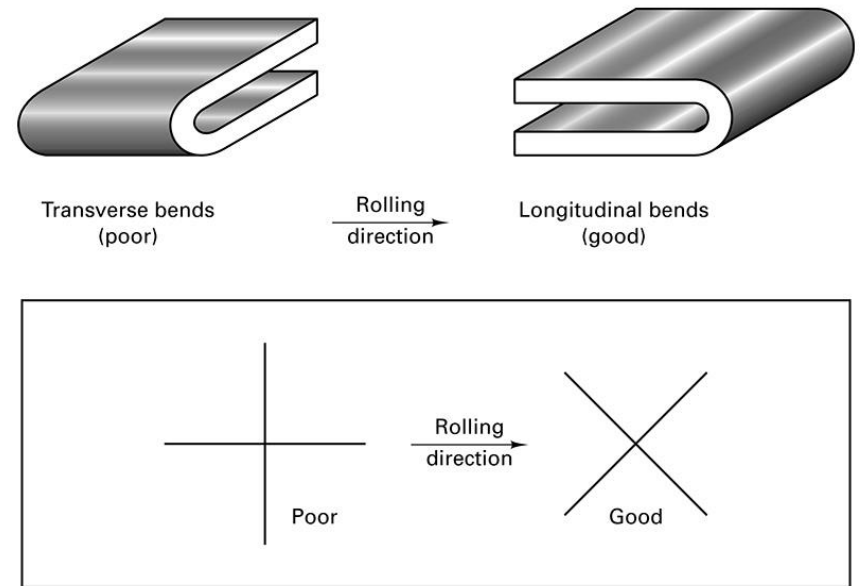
Bends should be made with the bend axis perpendicular to the rolling direction. When intersecting bends are made, both should be at an angle to the rolling direction, as shown.
